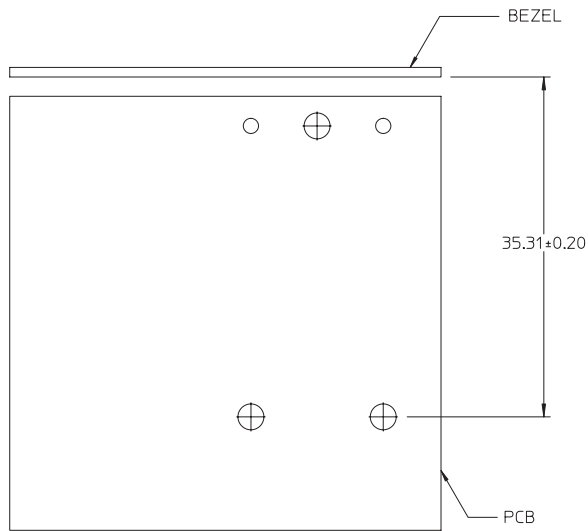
Package outline for AFBR-732BWZ and AFBR-742BZ (dimensions in mm).
